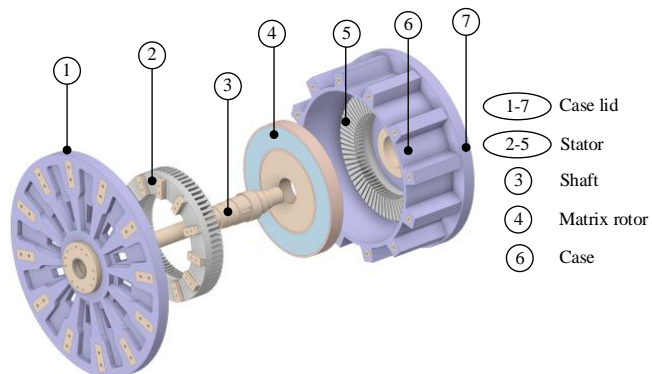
Exploded view of the AF-MRIM. The mechanical parts of the machine are listed for better understanding.
